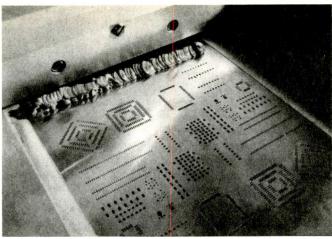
A brass stencil for the precision application of solder cream during SM assembly manufacture. The cream, at the top, is ready to be wiped across the stencil, which is precision aligned with the PCB beneath it.
